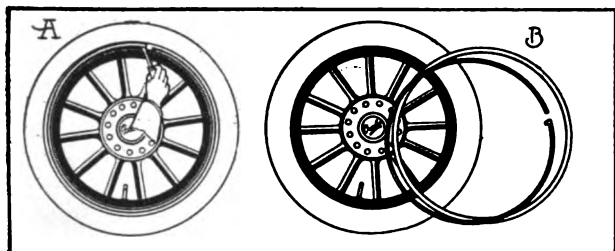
Displacing Q. D. Universal Rings: A, Removing Split Locking Ring; B, Showing the Inner and Outer Rings.
